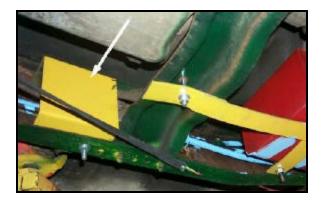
Fuel line cover. (Note: the old style front tank mounting bracket is shown in this photograph).
